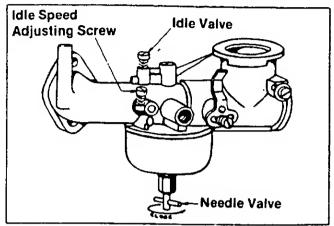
CARBURETOR ADJUSTMENT To Adjust:
